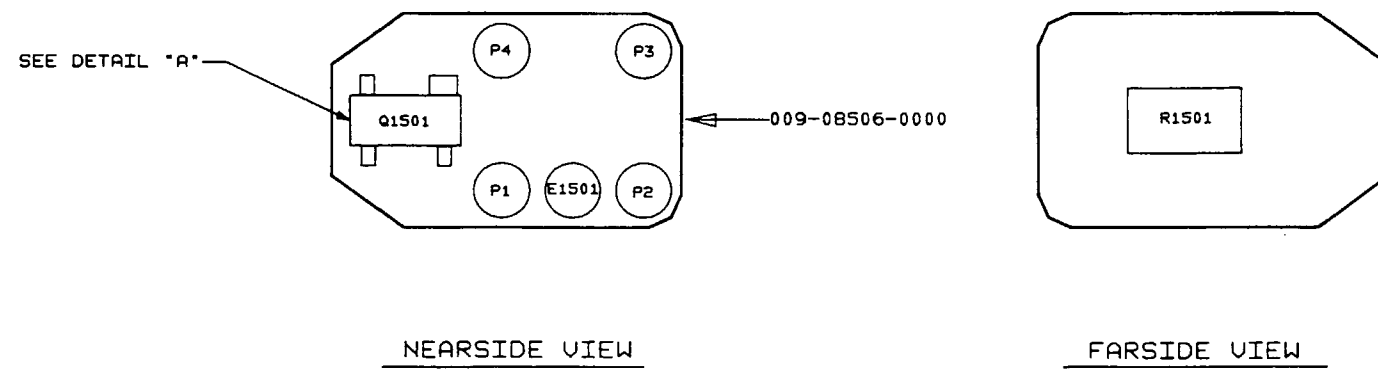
KR 87 RF AMP BOARD ASSEMBLY
